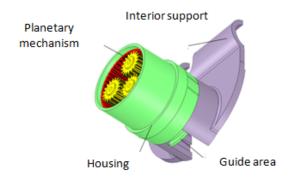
Assembling the planetary mechanism with the attachment system
